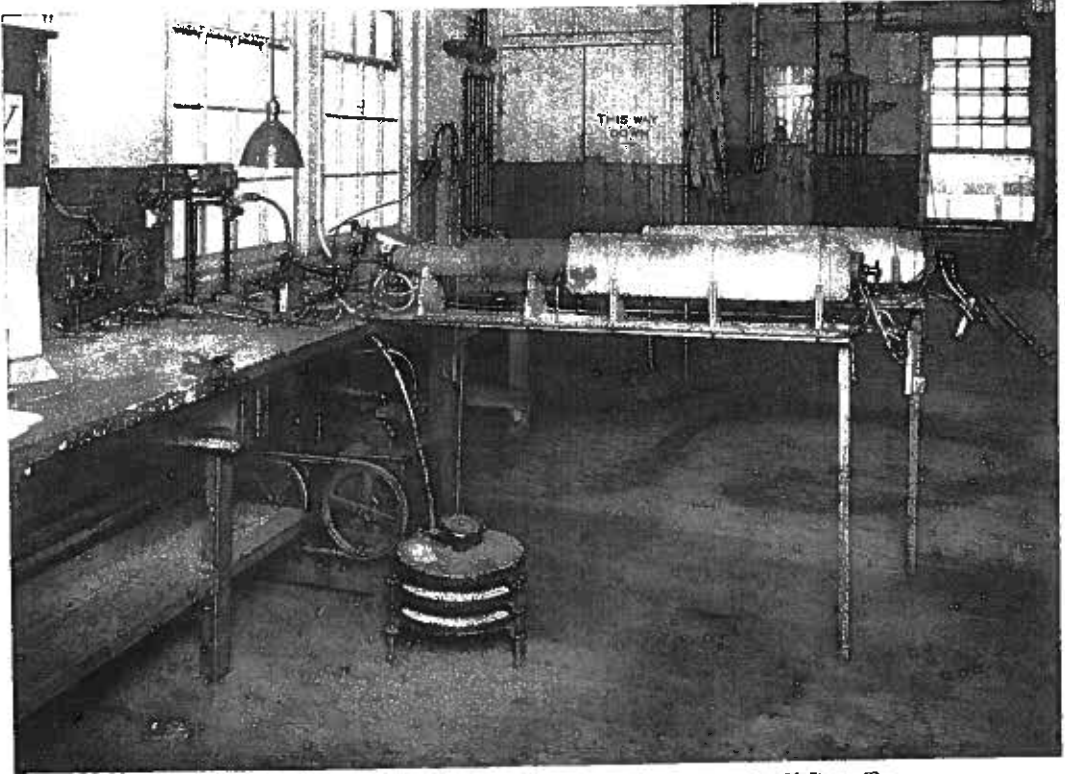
VACUUM FURNACE USED FOR FIRING METAL PARTS OF X-RAY TUBES.
